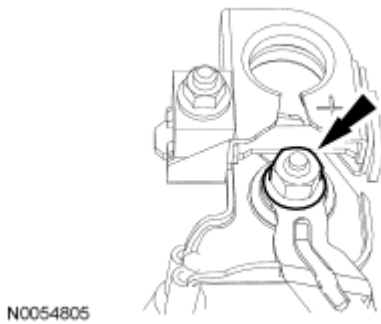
Locating Power Feed To Battery Terminal And Nut
